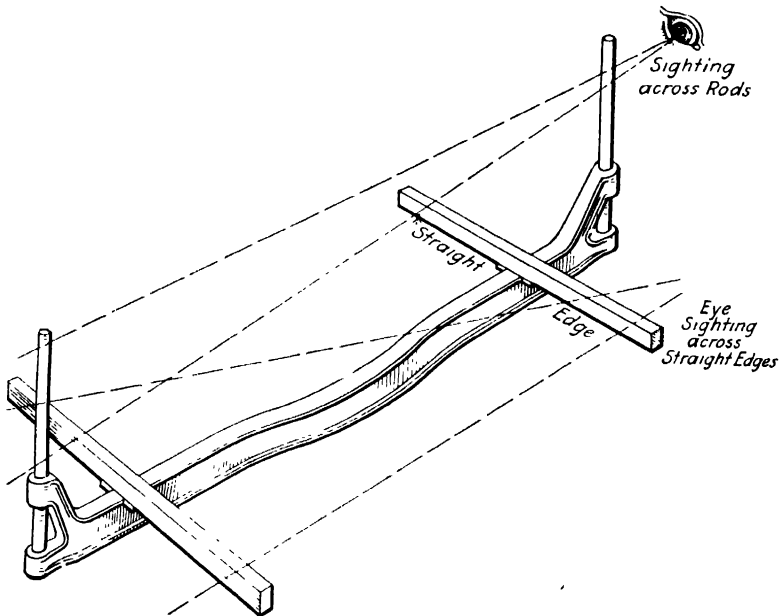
Checking Front Axle for a Twist between Spring Seats and Outside of Spring Seats.
